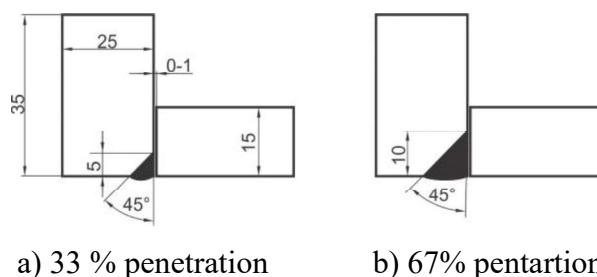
Preparation of welding specimens - groove geometry a) SPQR5 and SPQR7; b) SPQR6 and SPQR8
